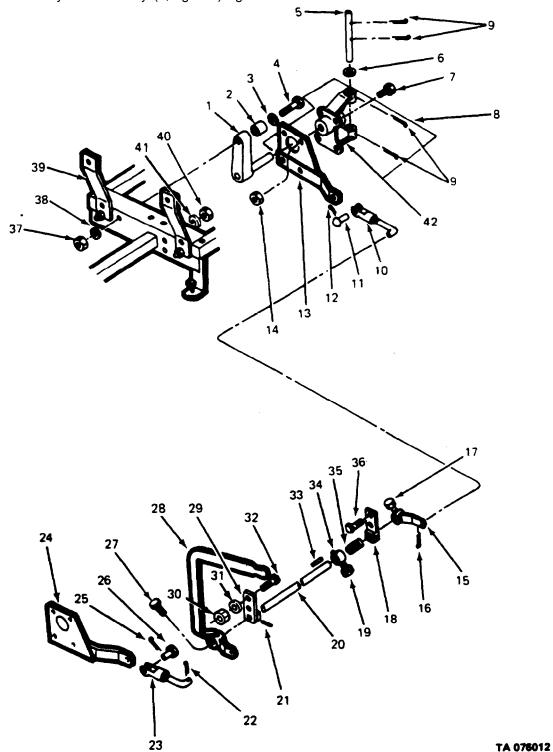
Disassemble/Assemble Sub frame (Sheet 1 of 2).
